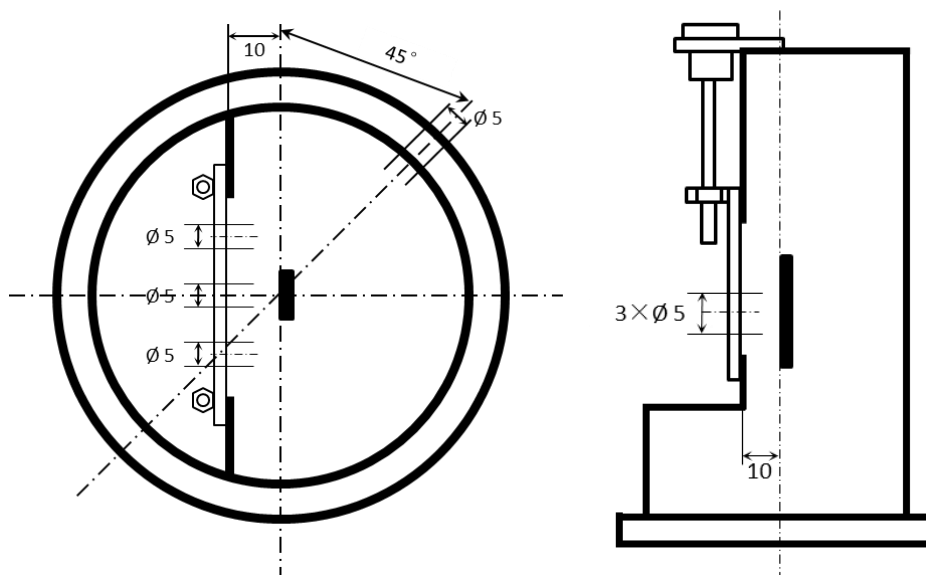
Drawings of the environmental chamber. See Paper I for further details.
